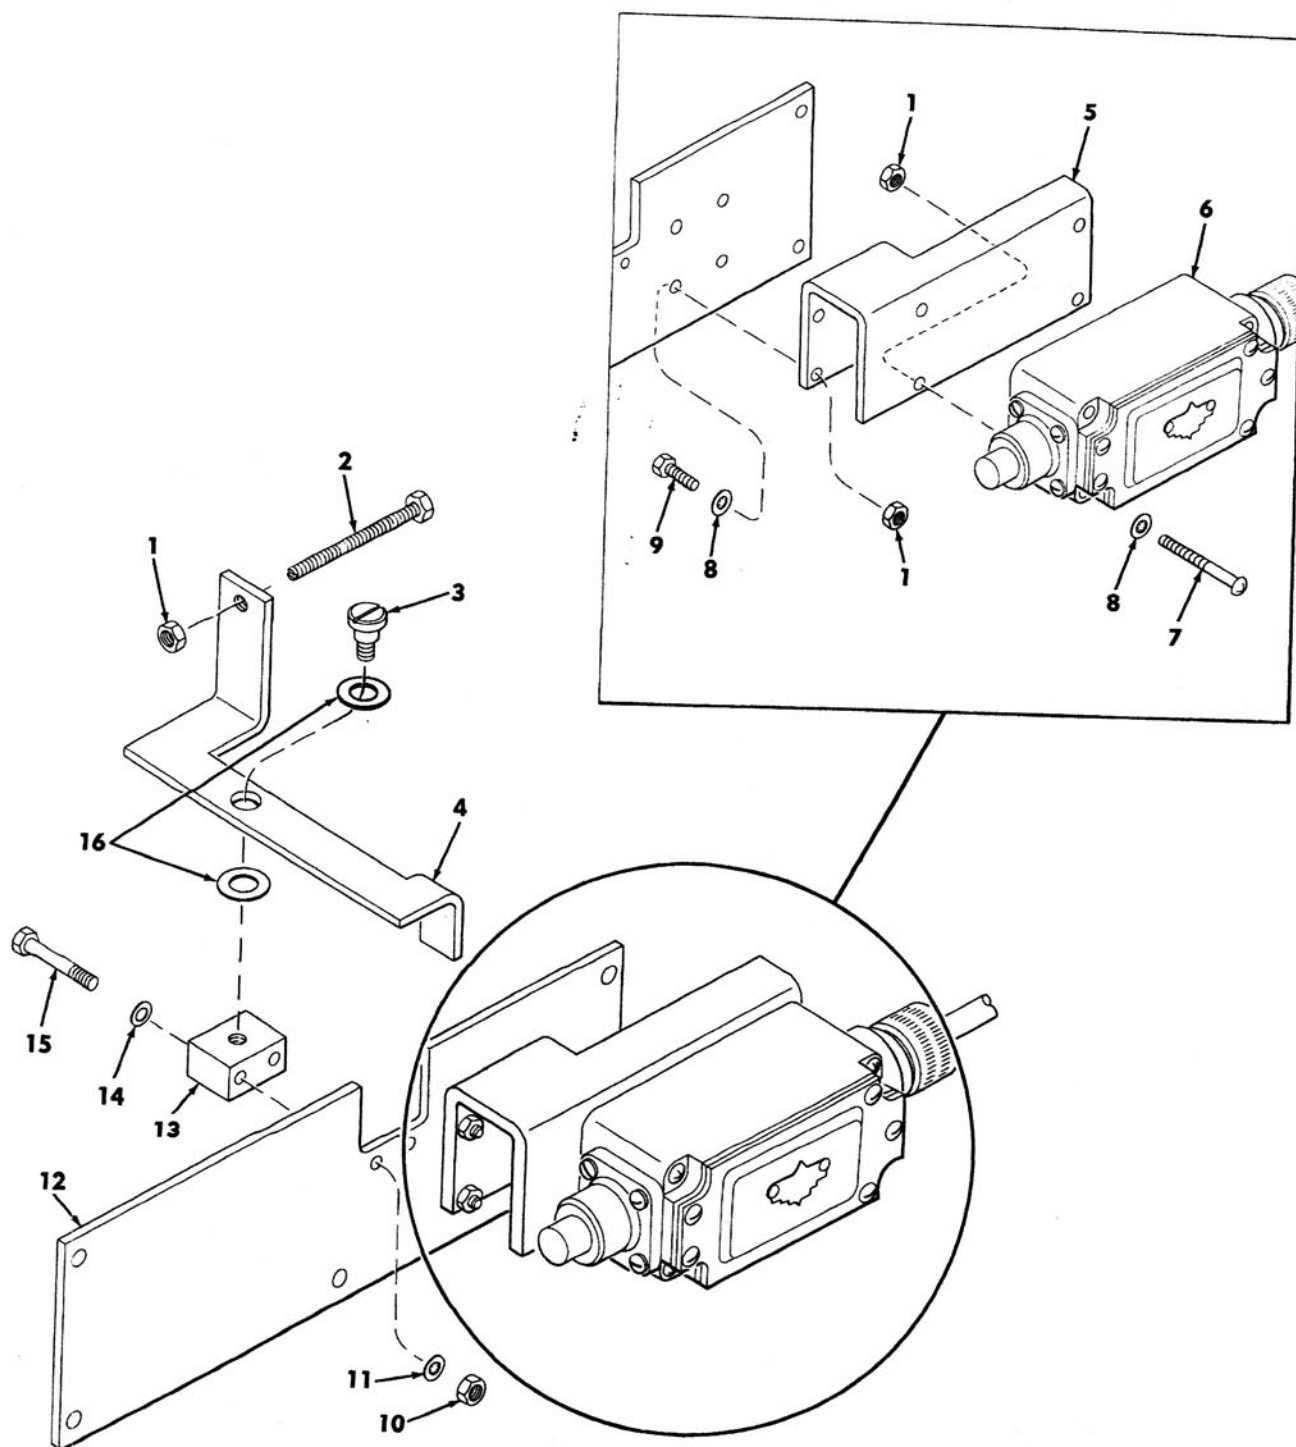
ELECTRICAL INSTALLATION, LAUNCHING RAIL /8167172/
